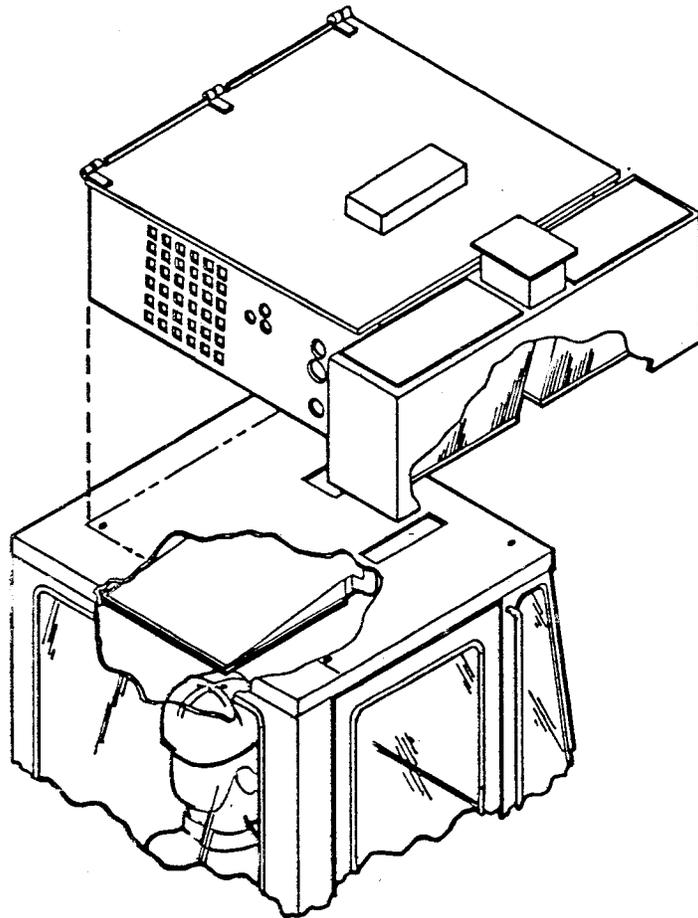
Air Conditioned, Partially Enclosed Cab System Installation
